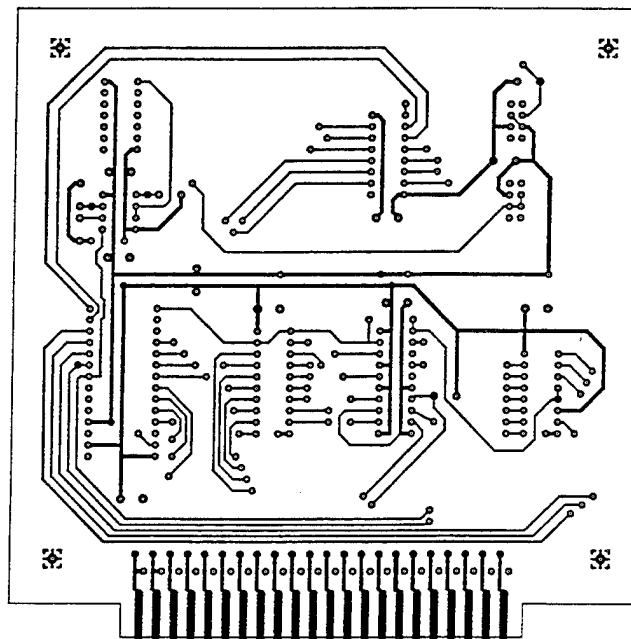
Artwork for the solder side of the data transfer control board printed circuit board.
